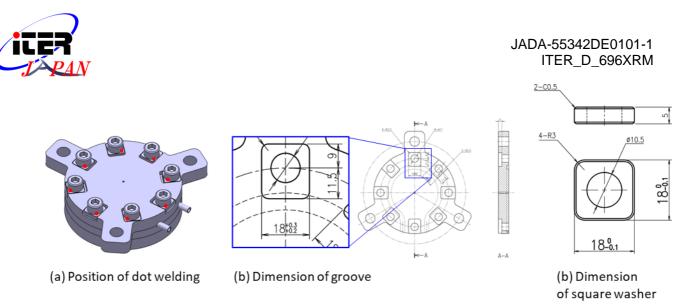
Mechanism of how to avoid the loosening of the bolt that is used to fix the tungsten mirror. The square chamfered washer can move in the radial direction of the mirror, but cannot rotate.
